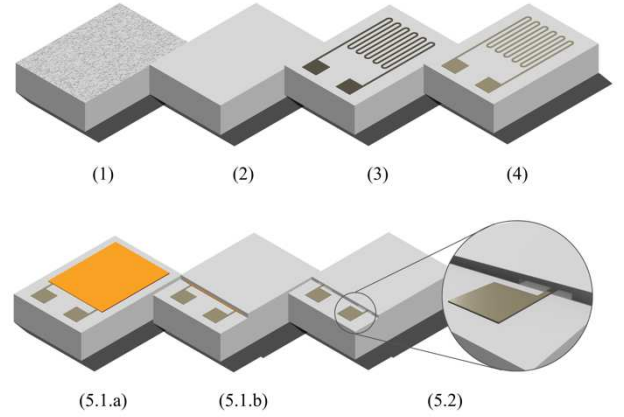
Fabrication process used to produce test specimens (1-4) and proof-of-concept devices (1-5). 3D printing to a certain layer (1), the surface is ironed (2), AJP deposition of silver nanoparticulate to produce sensor (3) and photonic curing to finalize sensor (4). Final structure using 3D printing (5) is produce following two alternative approaches: steps (5.1a–5.1.b) where kapton tape is placed to cover AJP tracks before continuing printing or step (5.2) where the following layer don't touch but remain hovering on the surface modelling a cave.
